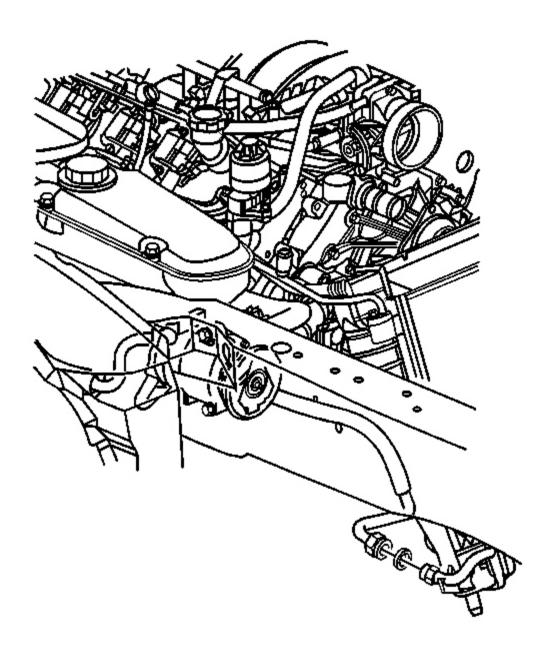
Compressor Hose & Condenser Courtesy of GENERAL MOTORS CORP.
